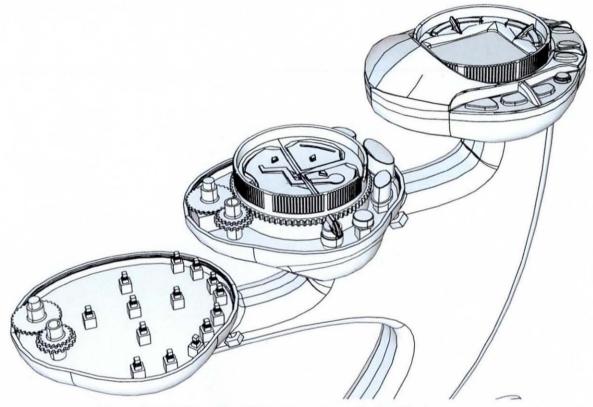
A view of the PTI parts produced in Pro Engineer
